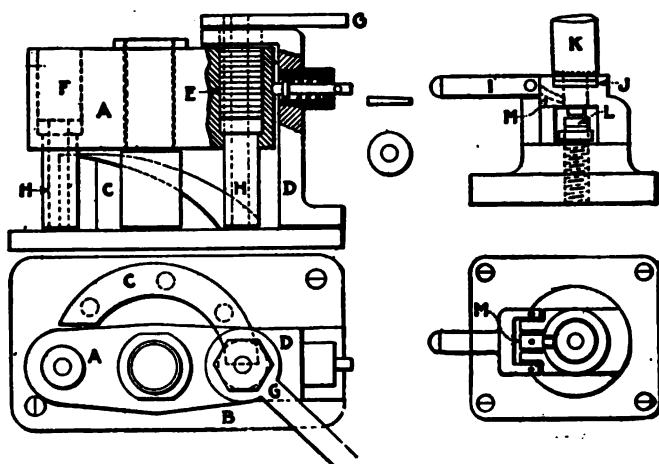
FIXTURE FOR MAKING TAPERED WASHERS
